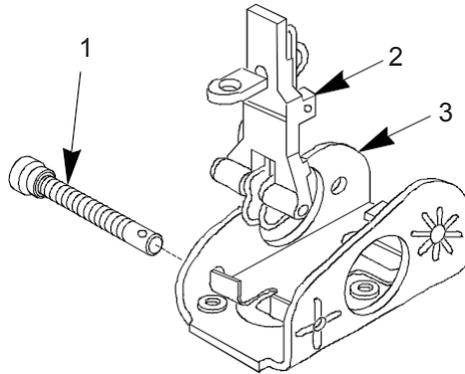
Machine Screw, Sight Leaf Assembly, Rear Sight Body
